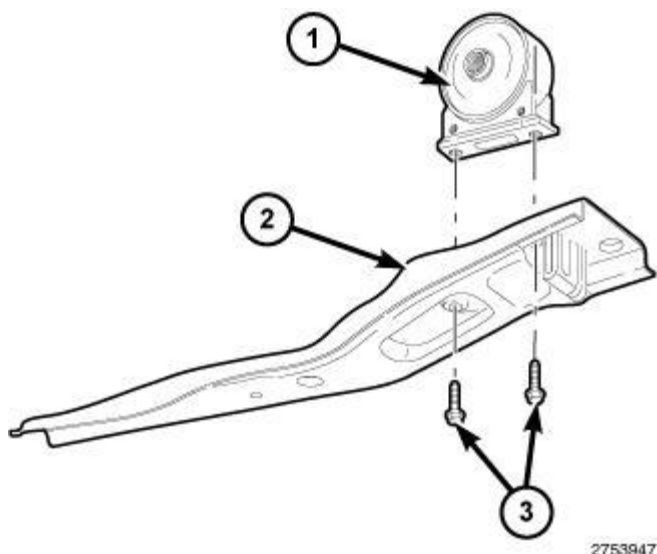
Front Engine Mount, Fore/Aft Member & Bolts
